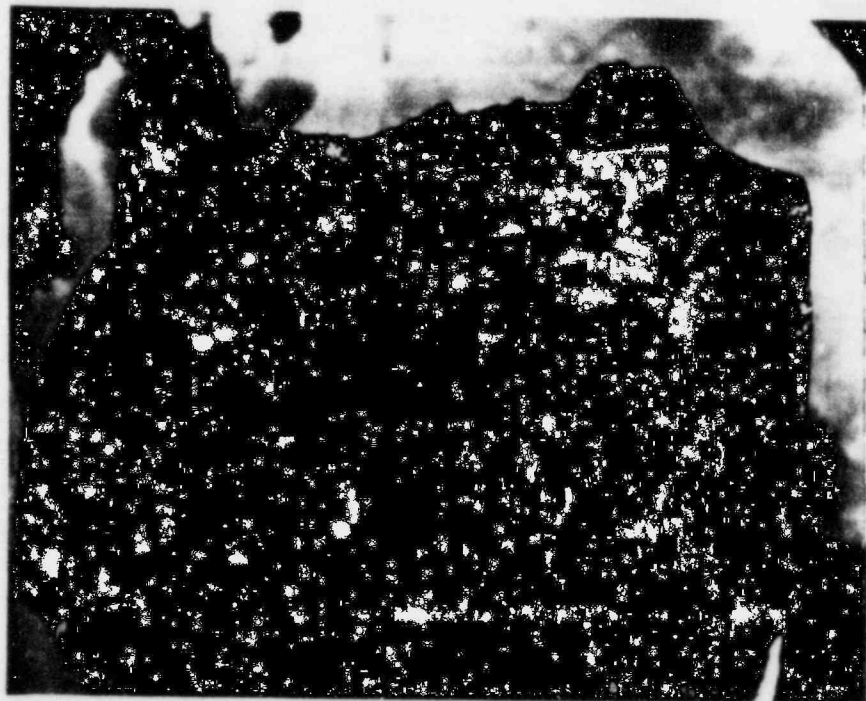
Fracture surface of segment including defect at vane location #2.
